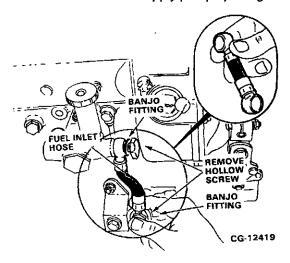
Remove Fuel Inlet Tube (Current Production)
